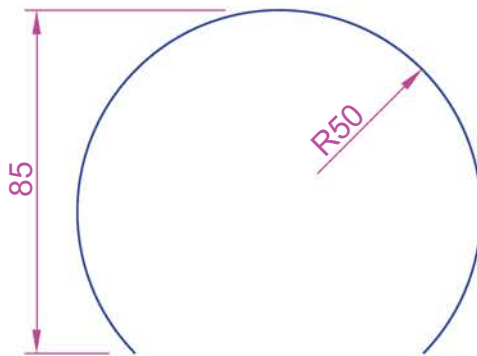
Second example – 3D Surface – the part circle to be extruded
